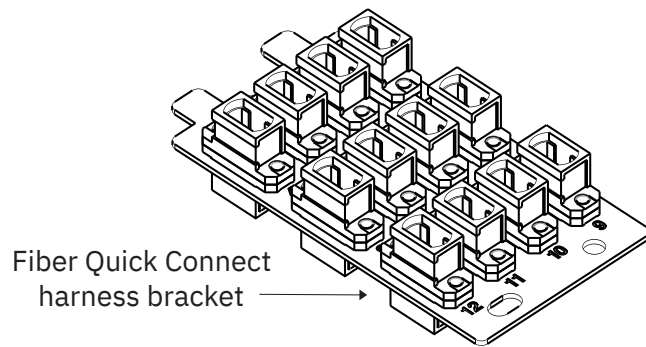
FQC harness bracket and mounting hardware, with bottom exit (7804)
